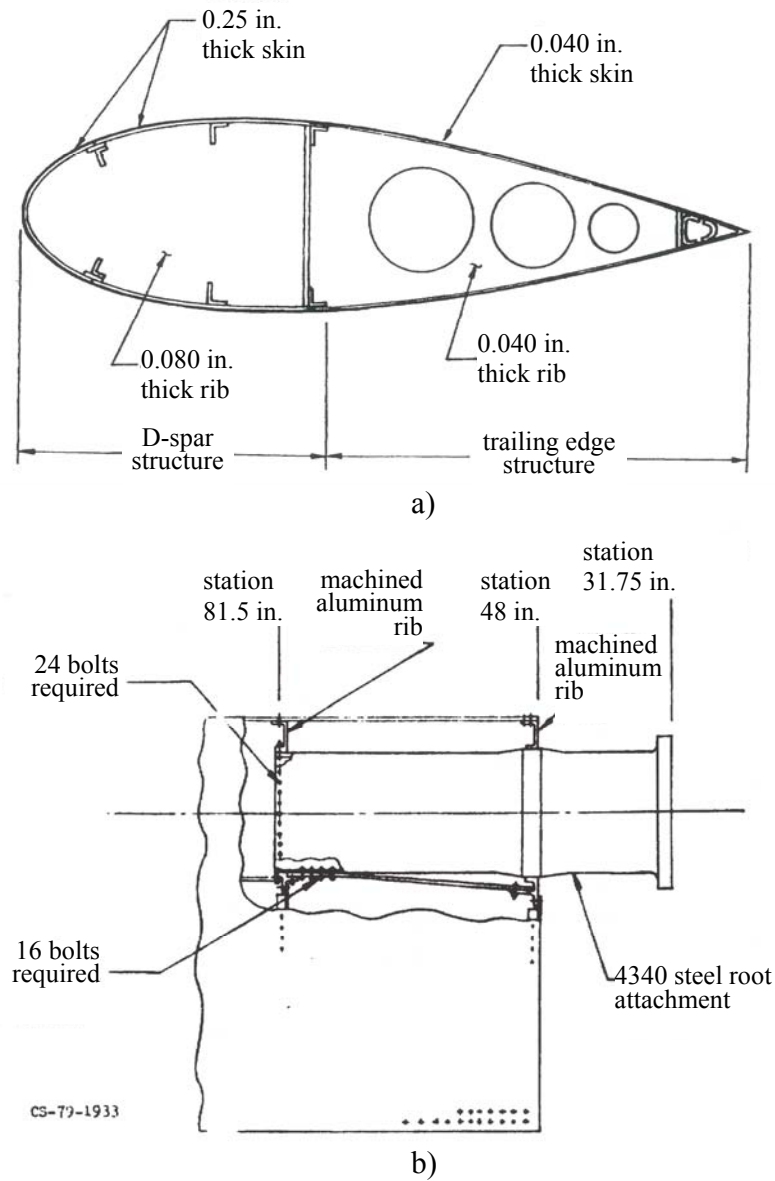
Lockheed's MOD-0 2024-T3 aluminum blade design [12]. a) cross-section details showing skin, rib and stringer construction, b) root attachment details.
